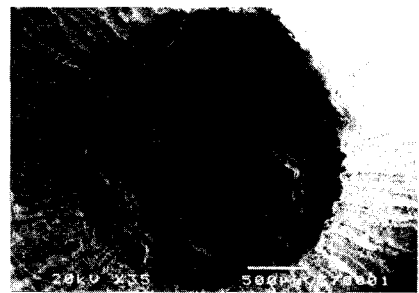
Fracture surface at 900℃(61758cycles)
